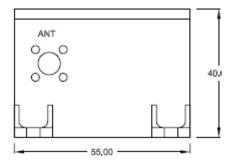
Mechanical Drawing of SPACE GPS unit-Box Rear View
